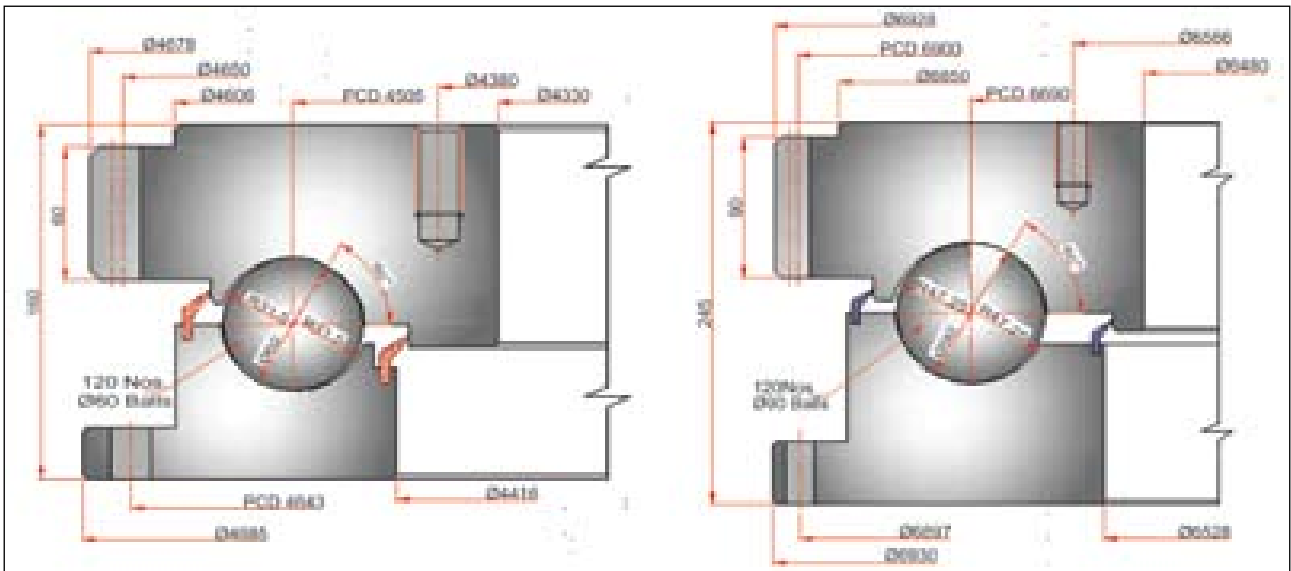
Geometrical details of large diameter bearing for SRP & LRP
